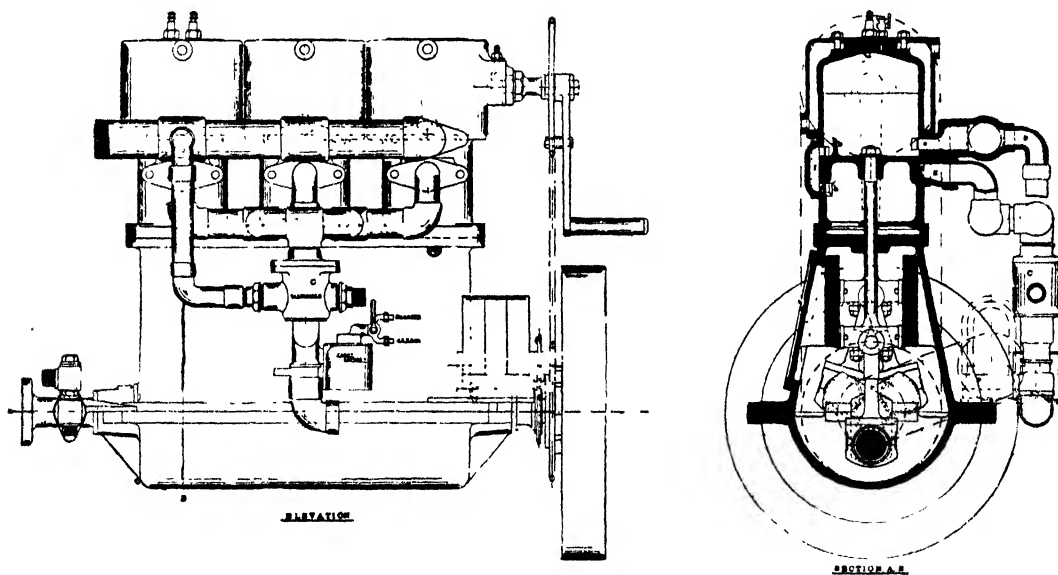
The Reliable motor, showing crosshead guides, etc.
